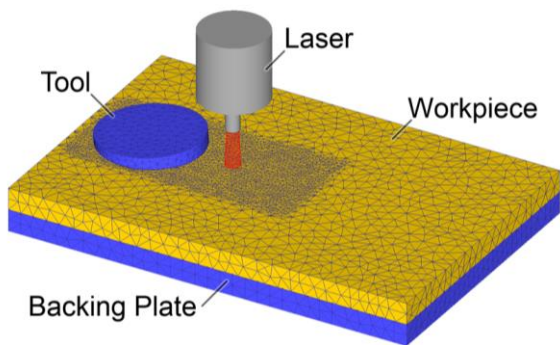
The meshed FE model showing the tool, workpiece, and backing plate (under the workpiece). Shown superimposed is a rendering of the in-process laser source.
